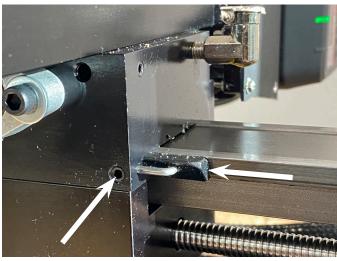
The arrows are pointing to the Z-axis lathe set screw and gib locations.
